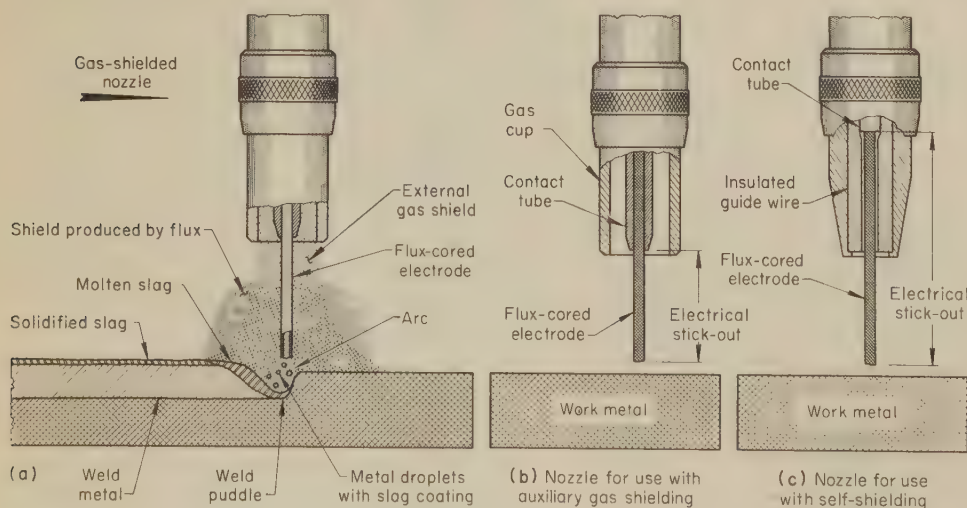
(a) Operating principles for flux-cored arc welding with auxiliary gas shielding; (b) and (c) nozzles for auxiliary-gas-shielded and for self-shielding methods of flux-cored arc welding (note difference in lengths of electrical stickout).
